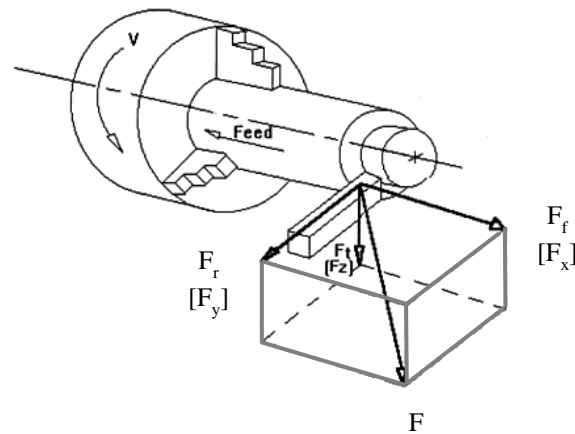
Cutting force components on a single point cutting tool during turning (Dimla 2000)
